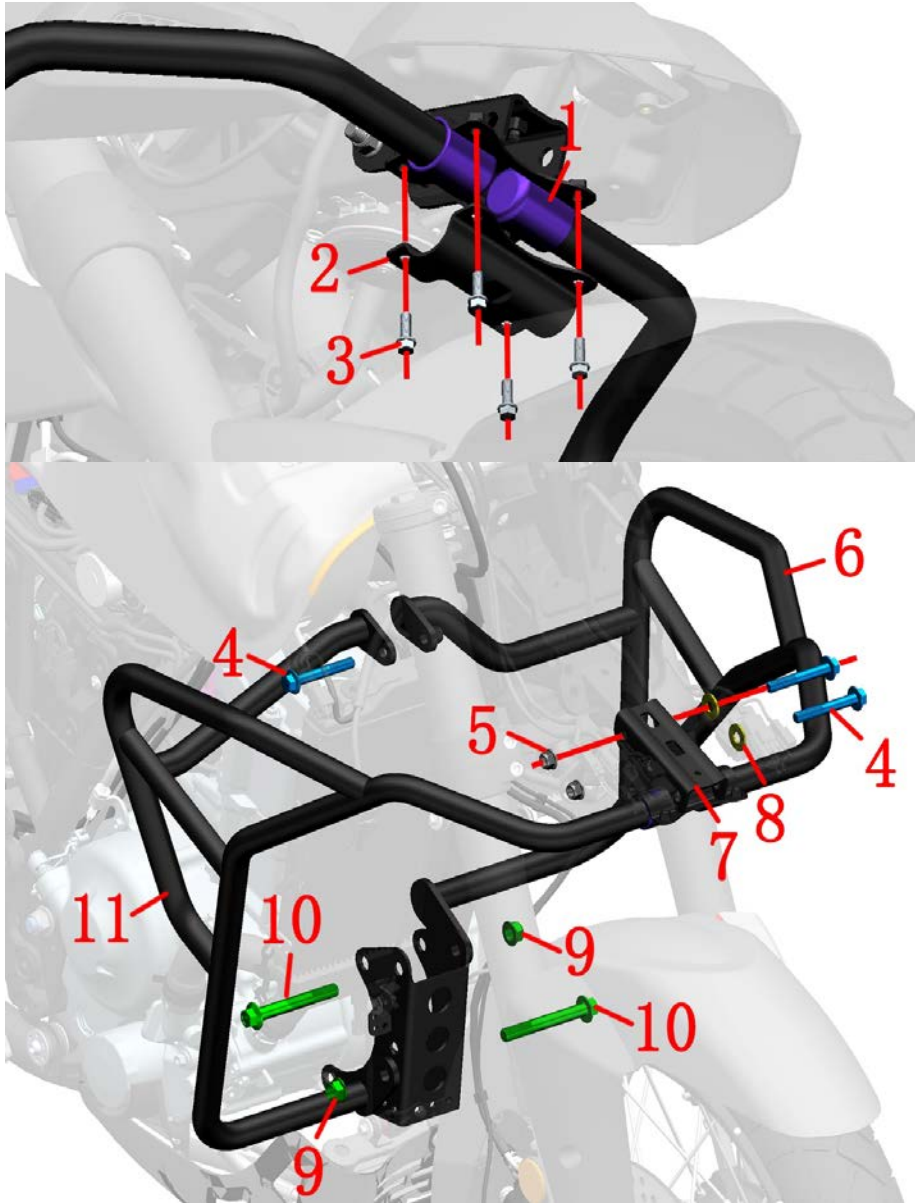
Crash Bar Assembly		Crash Bar Assembly		CHK	CAUTION
